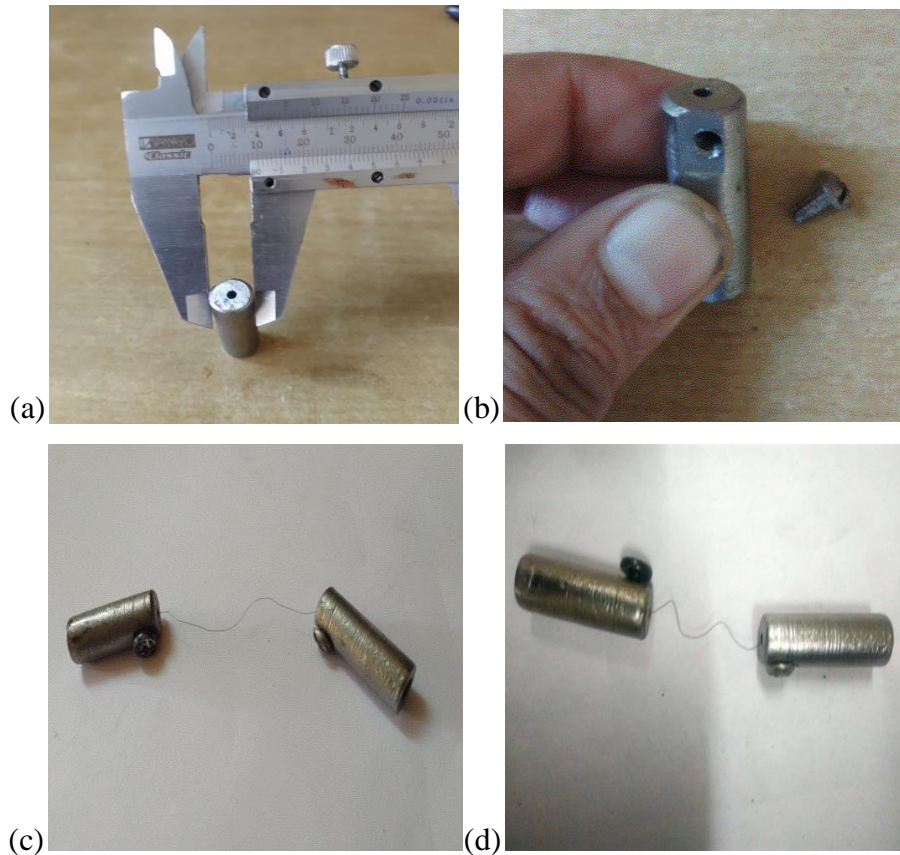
a) mild steel piece with axis face hole (2.00mm), (b) mild steel piece with turning side hole (3.4mm, tap size i.e. m4x0.75), (c) final SMA-based specimens with 0.1mm NiTi wire, and (d) final SMA-based specimens with 0.2mm NiTi wire
